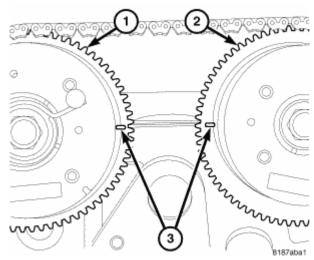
CAMSHAFT TIMING Courtesy of CHRYSLER LLC
